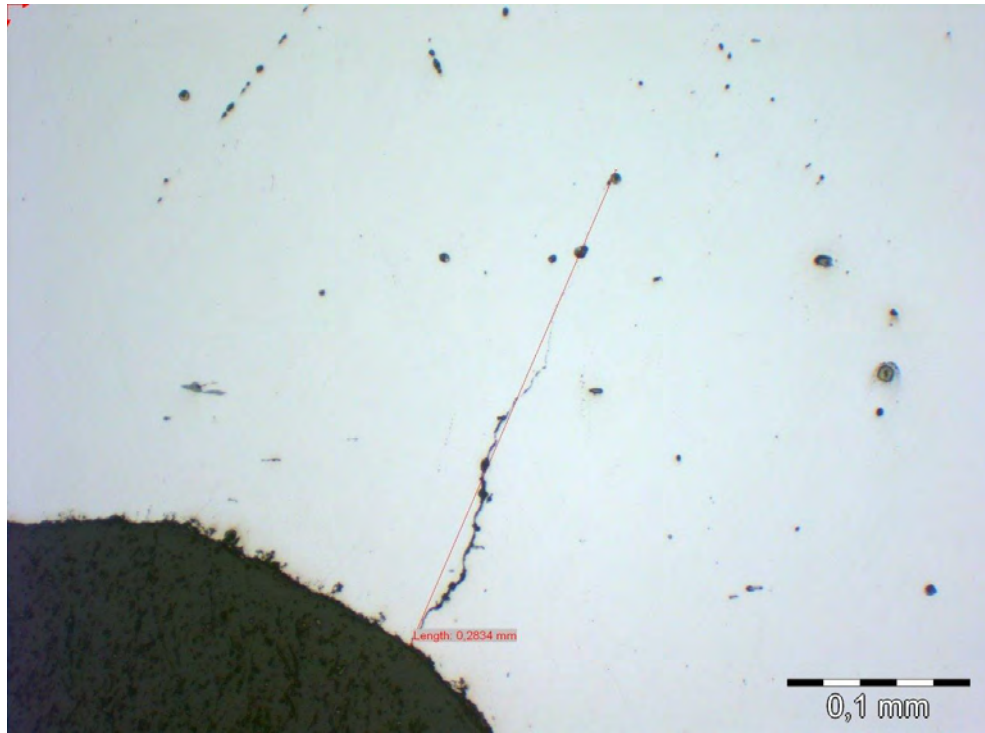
Cut four in crack at segment B, second ridge on barrel no. SFK 0120-A
